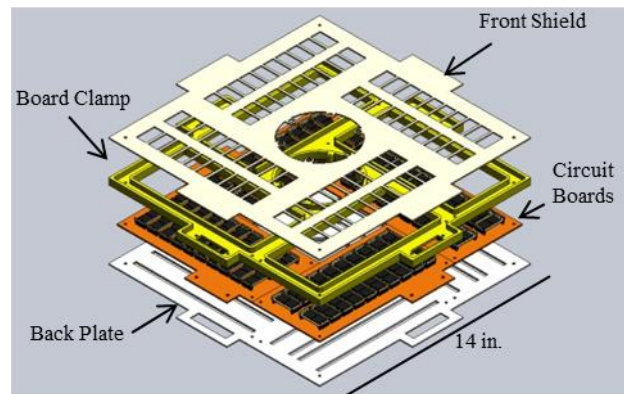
Exploded view of the thruster cathode array design. The four major components of the array are visible in this view.
